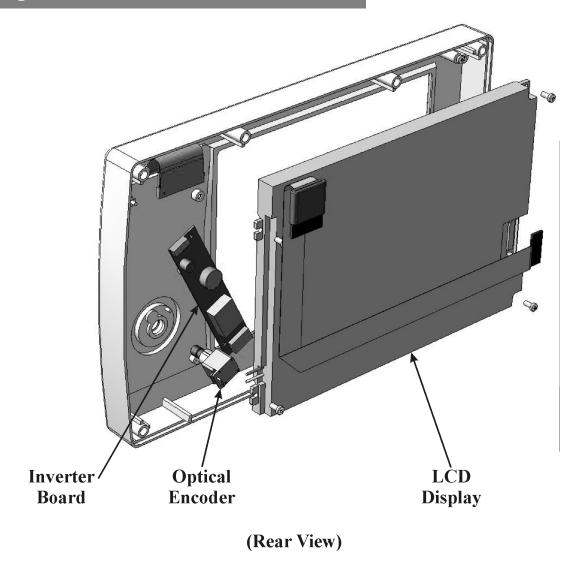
Monitor Front Bezel Assembly View A (Rear)
